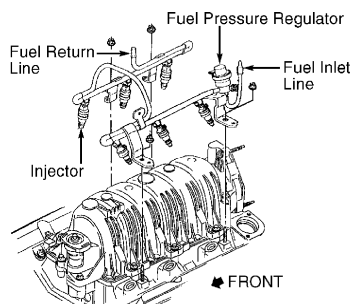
Locating Fuel Rail Assembly Components (3.1L - VIN M & 3.4L - VIN E)
